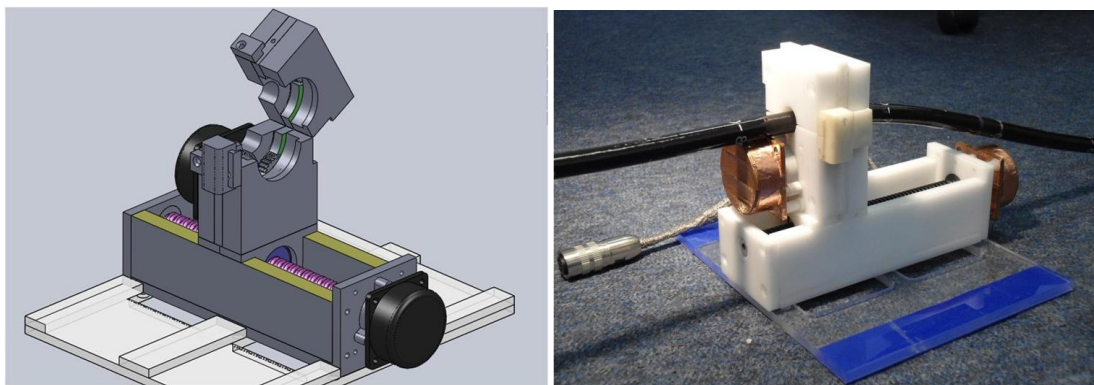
A dedicated motor is used to translate the endoscope flexible section via a leadscrew (left). Prototype actuator module is shown (right).
